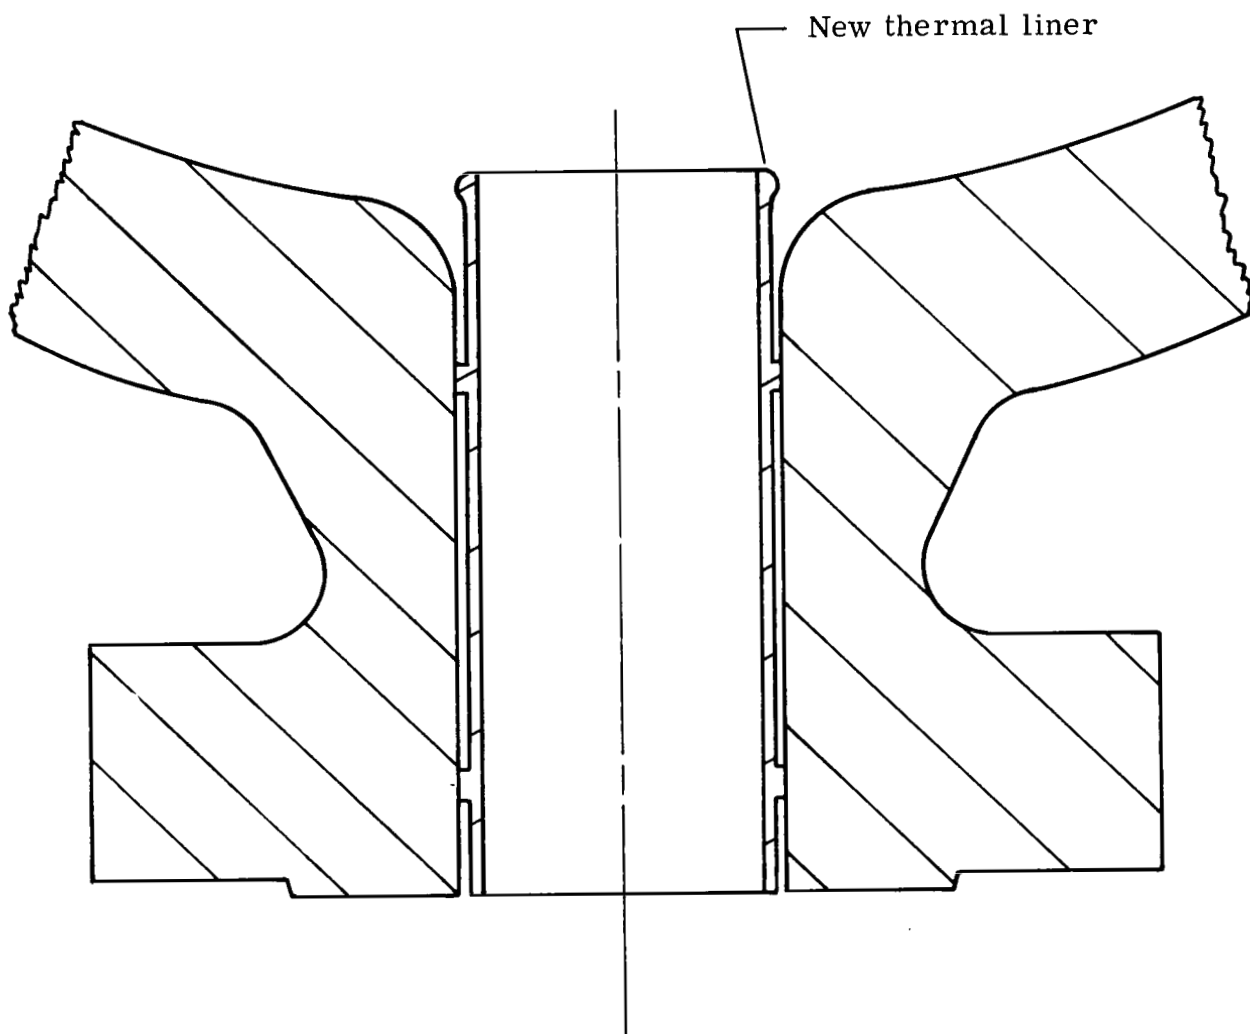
Cross-sectional view of modified air-storage-vessel nozzles.
